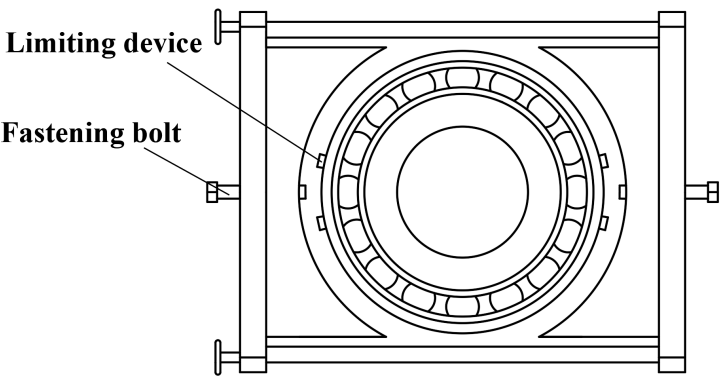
Retainer-free angular contact bearing CN211371041U.
